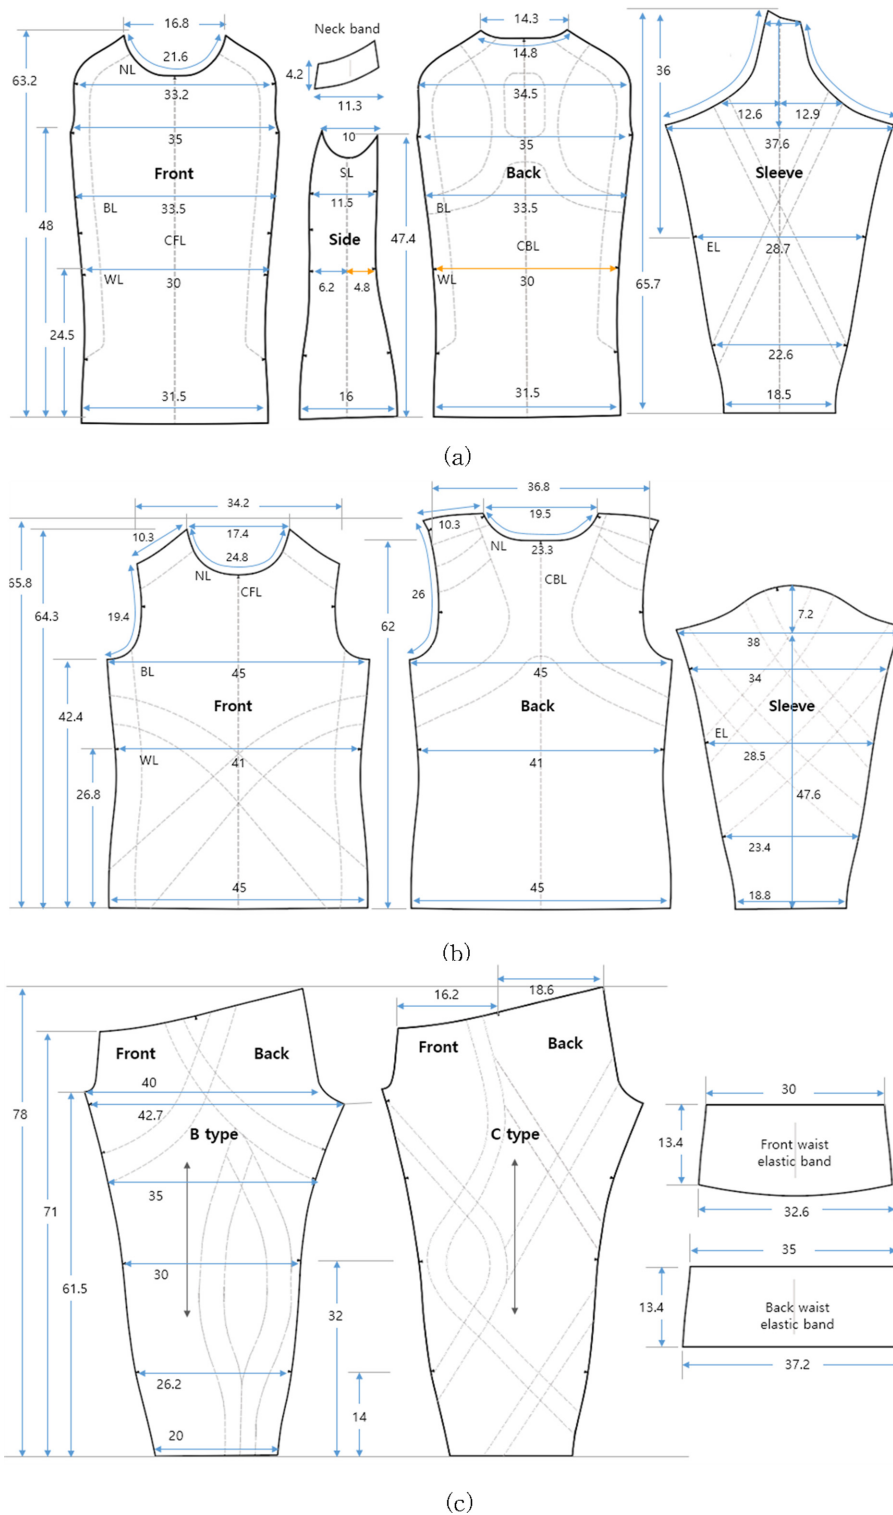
Development clothing pattern and dimensions; (a) B type top pattern and dimensions, (b) C type top pattern and dimensions, (c) B type & C type slacks pattern and dimensions.
